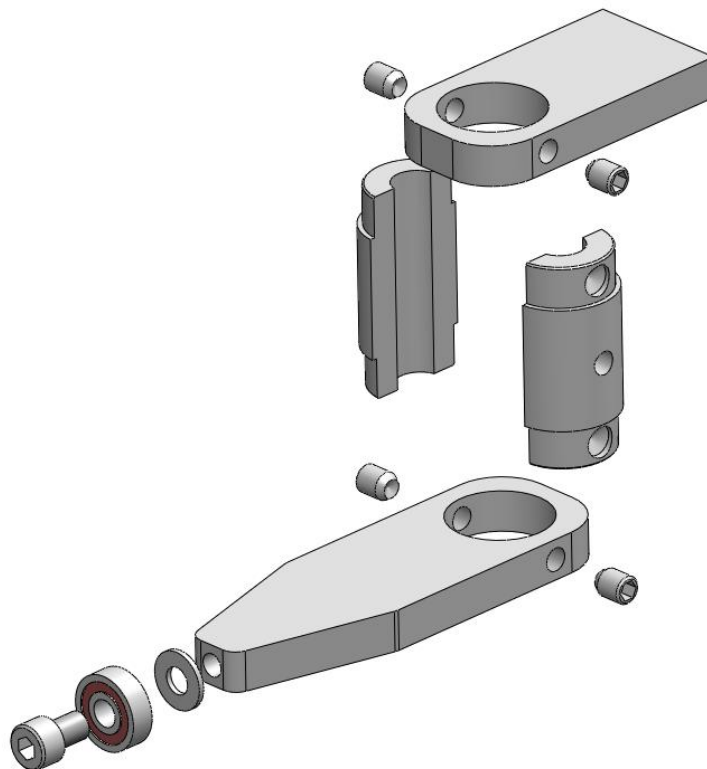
Stemp Clamp used to fasten the Actuator Stem to the Valve Shaft
